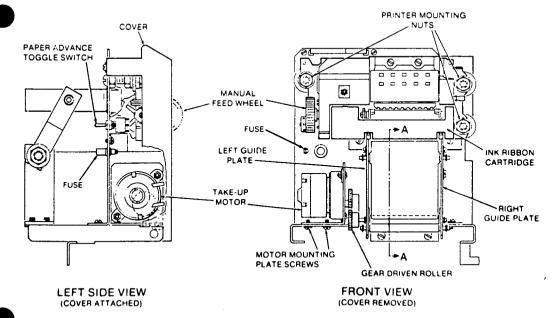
PRINTCON PRINTER ASSEMBLY. (Units Before 6/85)
